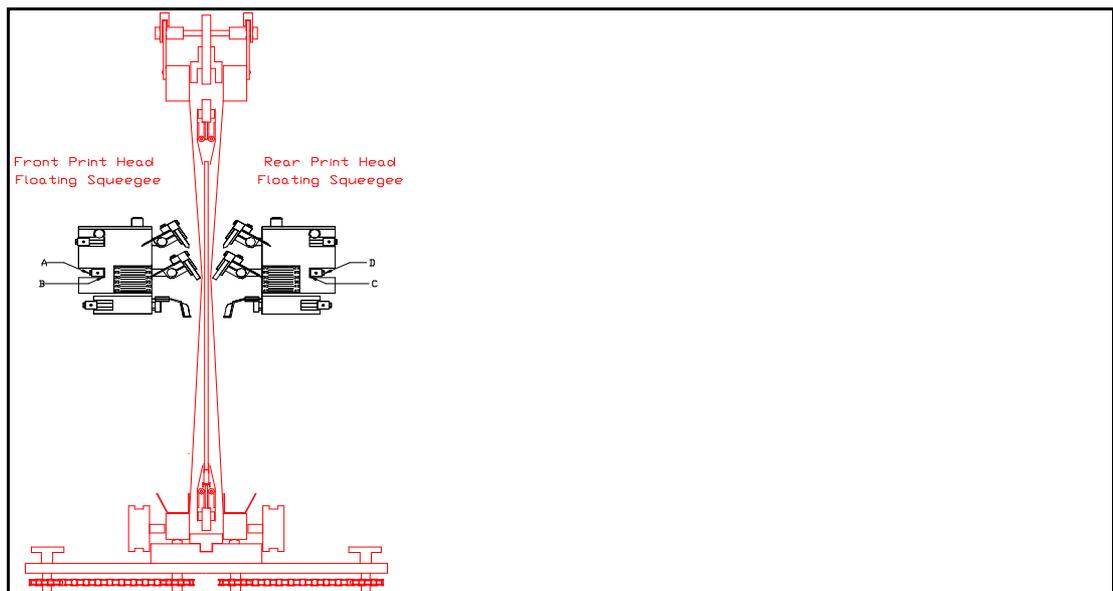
is an example of the front and rear squeegee stroke length set too short. In this example note that both squeegees are extended to the bottom of the squeegee drive bar guide slot at Item B and C, Fig. 4. The front and rear squeegee have both moved to the fixed position. In this instance:
